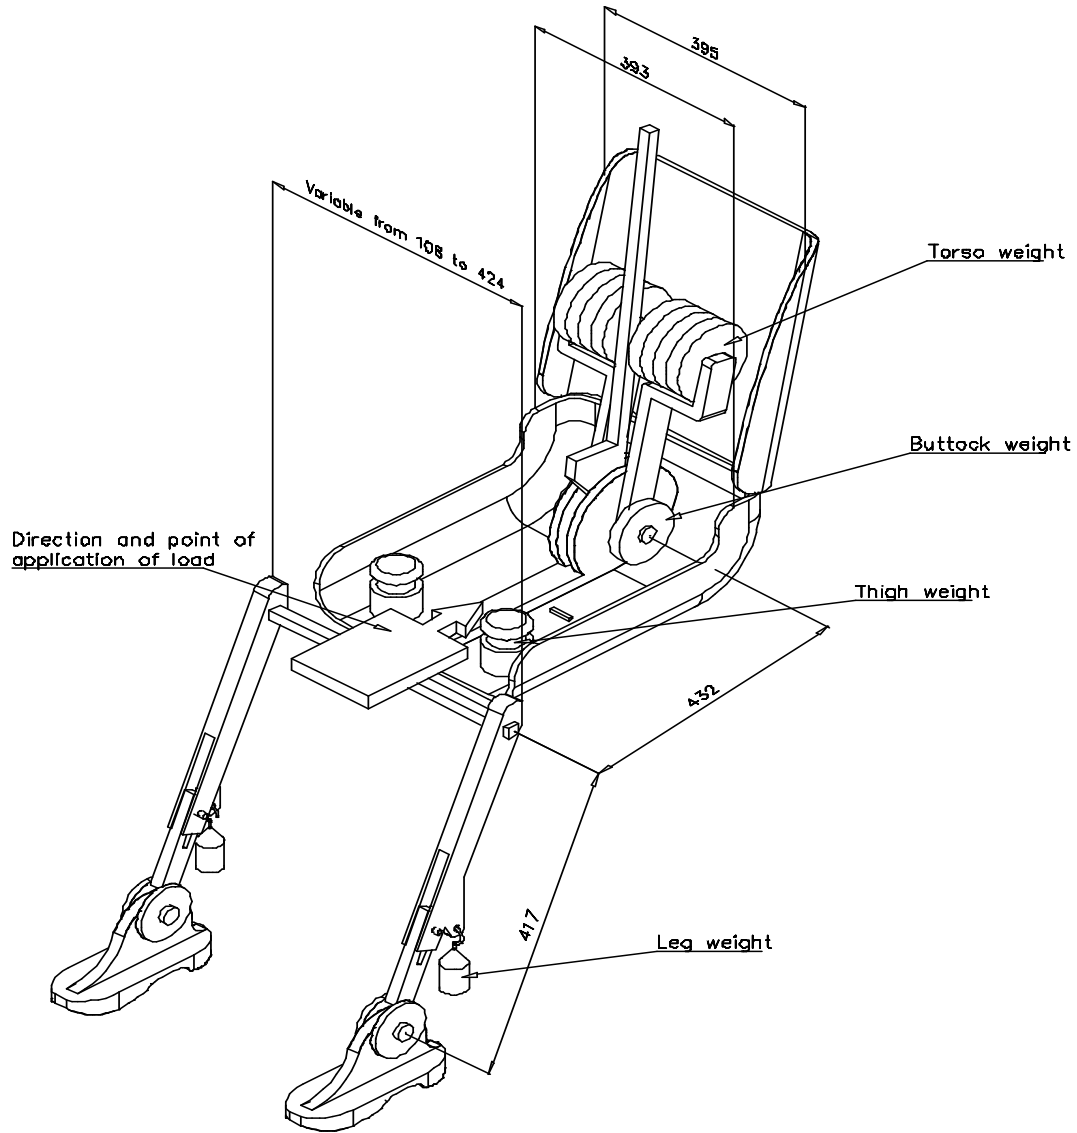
Dimensions of the 3-D H machine elements and load distribution
